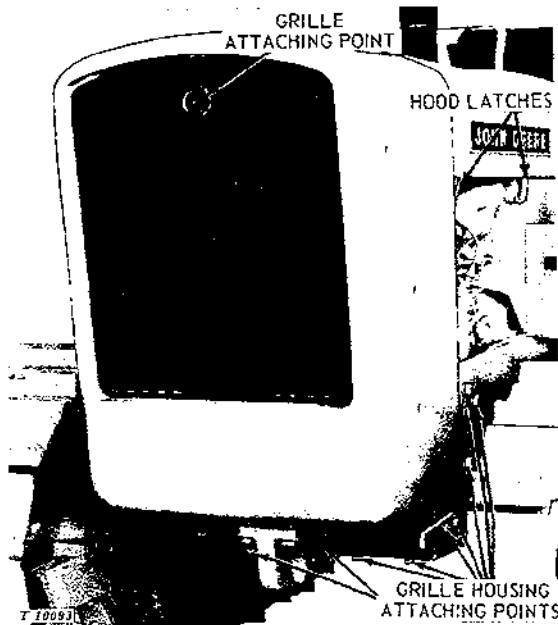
Hood and Grille Housing Attaching Points
